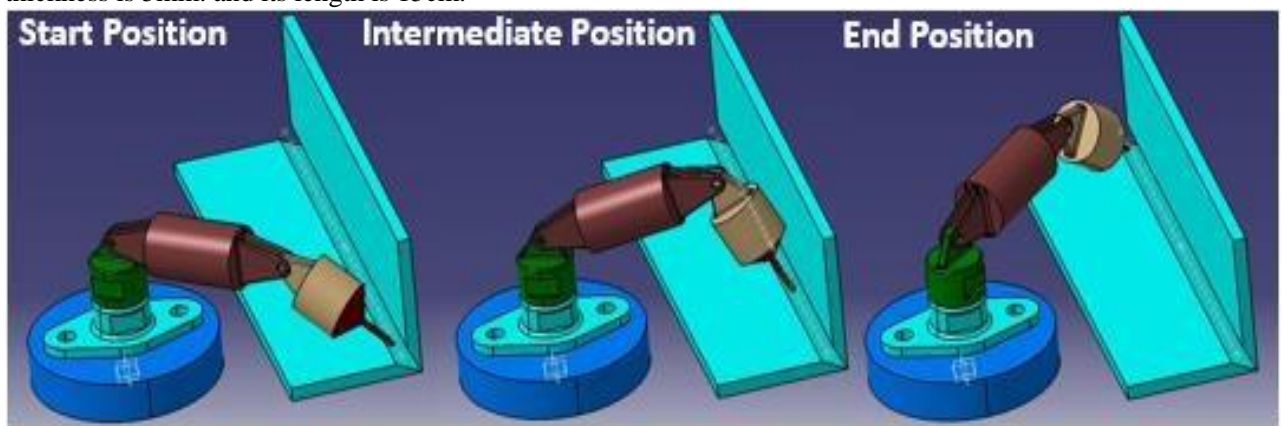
Robot following seam path for performing Welding operation of L - joint
